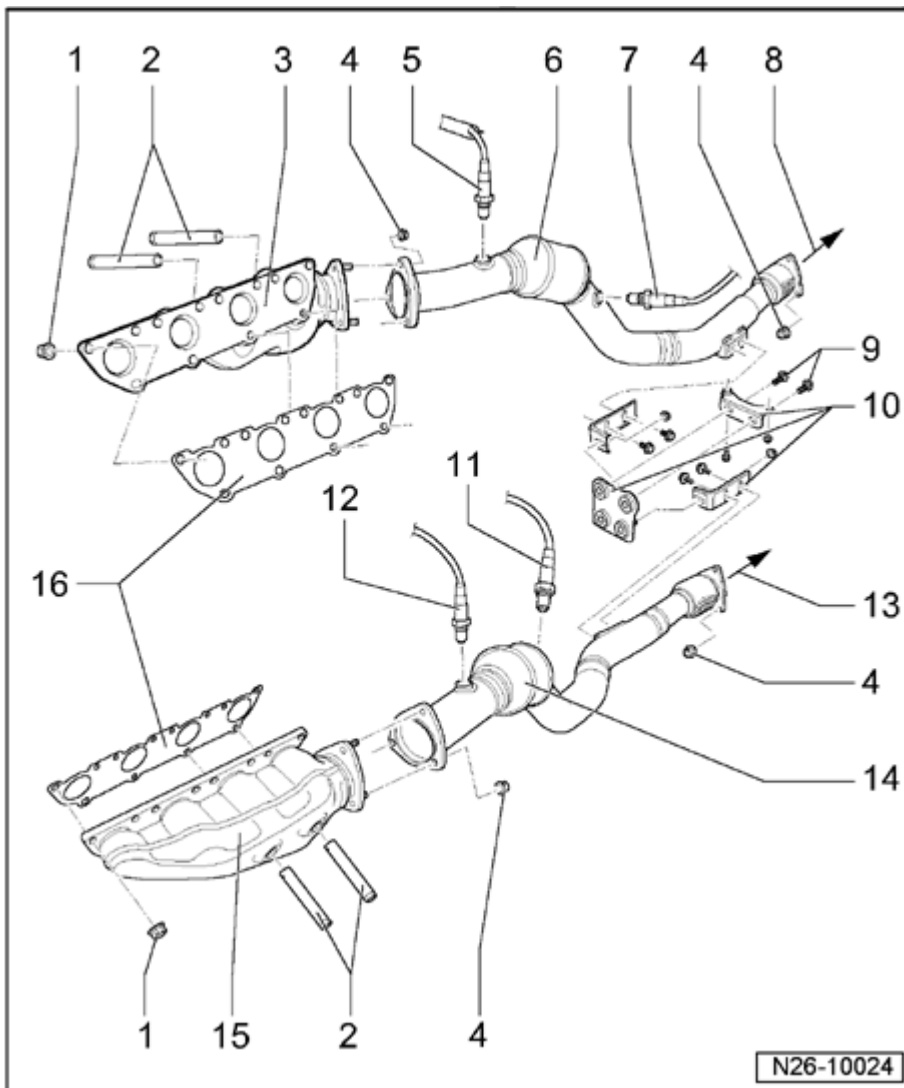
Exhaust Manifolds With Primary Catalytic Converters And Attachments, Assembly Overview
